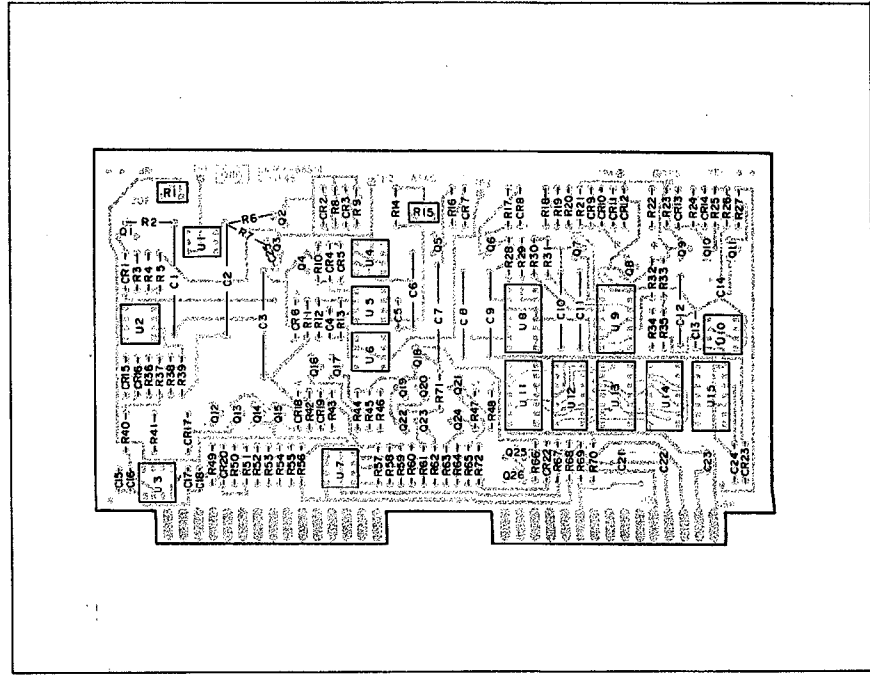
A14 Phase Detector & Integrator Board Assembly Component Locations.
